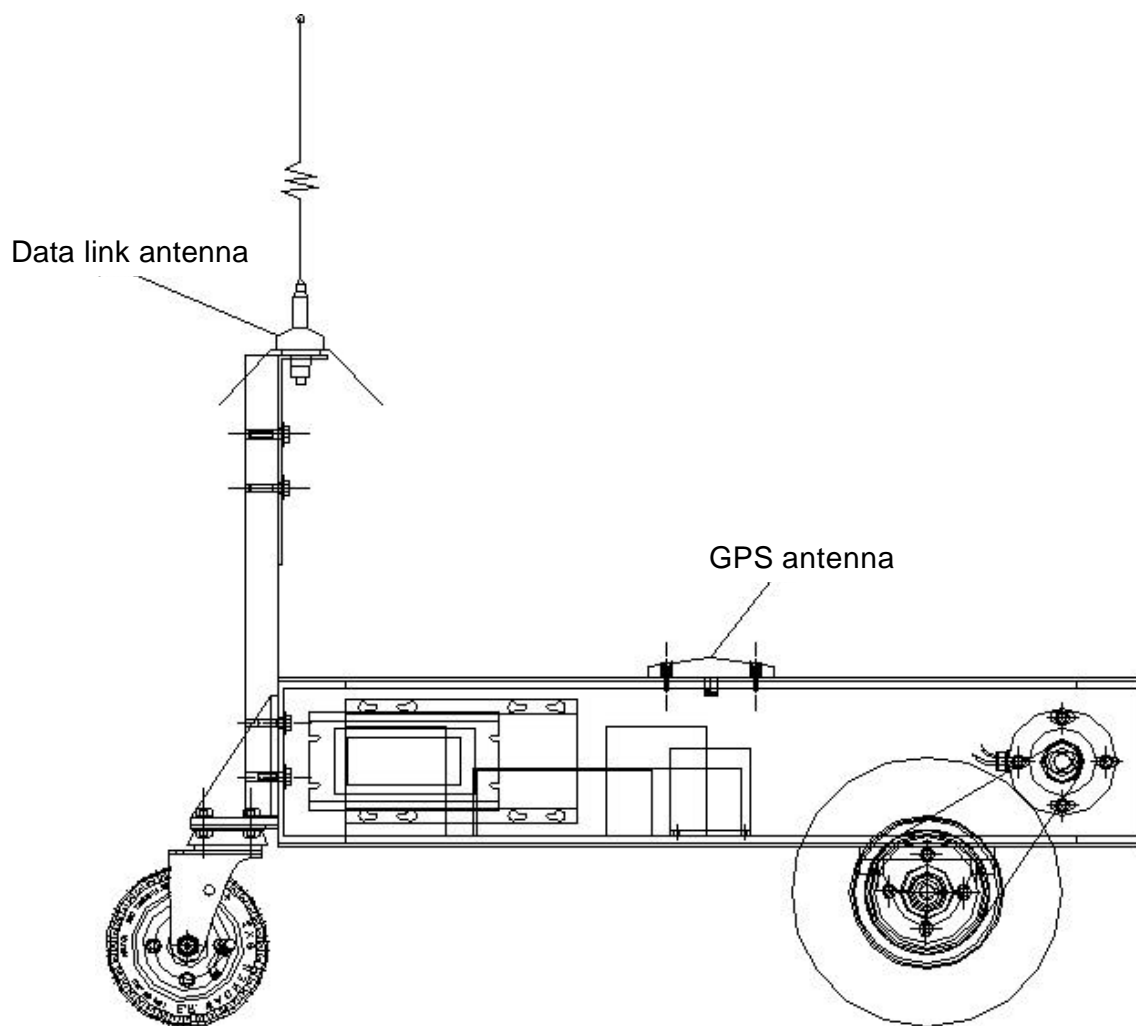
Leonard Assembly, Side View (Drawing Courtesy of John Christ)
